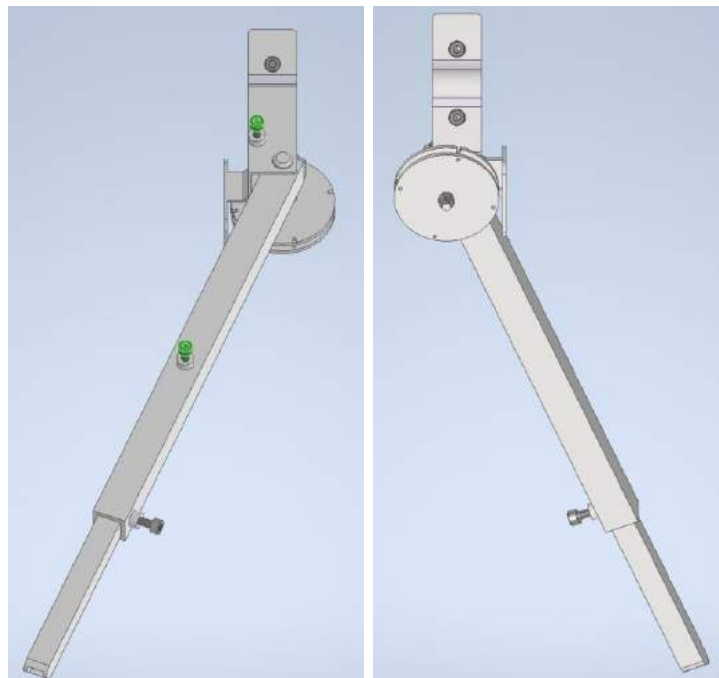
Front and rear view of left-side mechanism that supports bicycle
